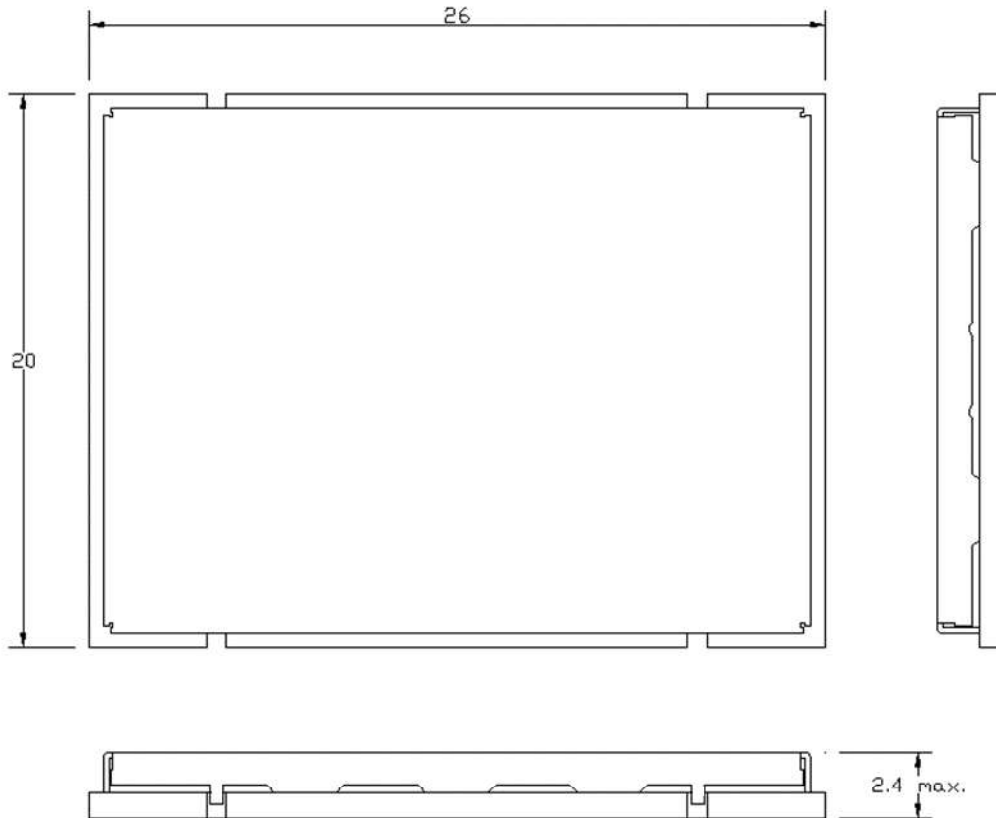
Dimensions of the module (TOP VIEW) (unit: mm)
